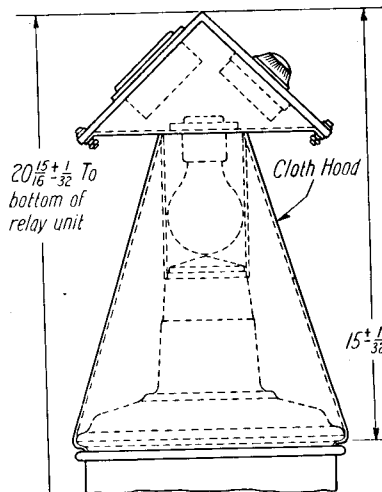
ADJUSTING DEVICE FOR LIGHTING CONTROL RELAY, FOR 115 VOLTS SERVICE
